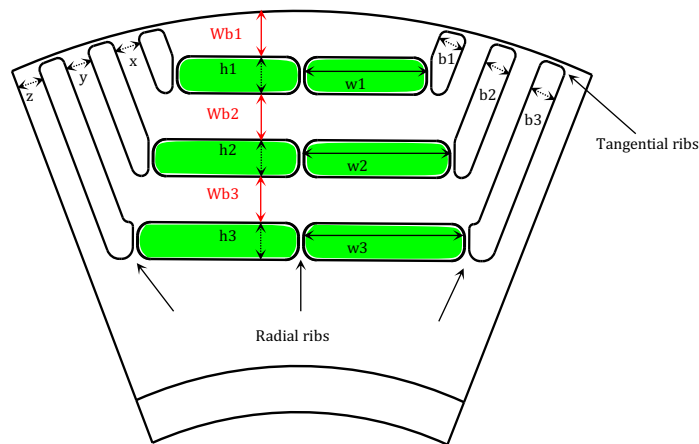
Rotor sketch of a PMA-SynREL machine
